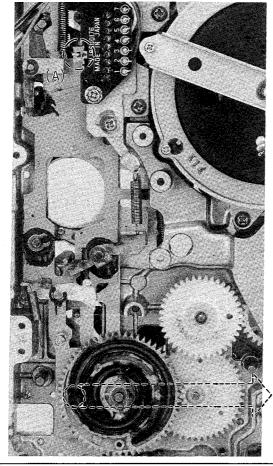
Adjustment of Cam Gear and Mode Select Switch - (4)
